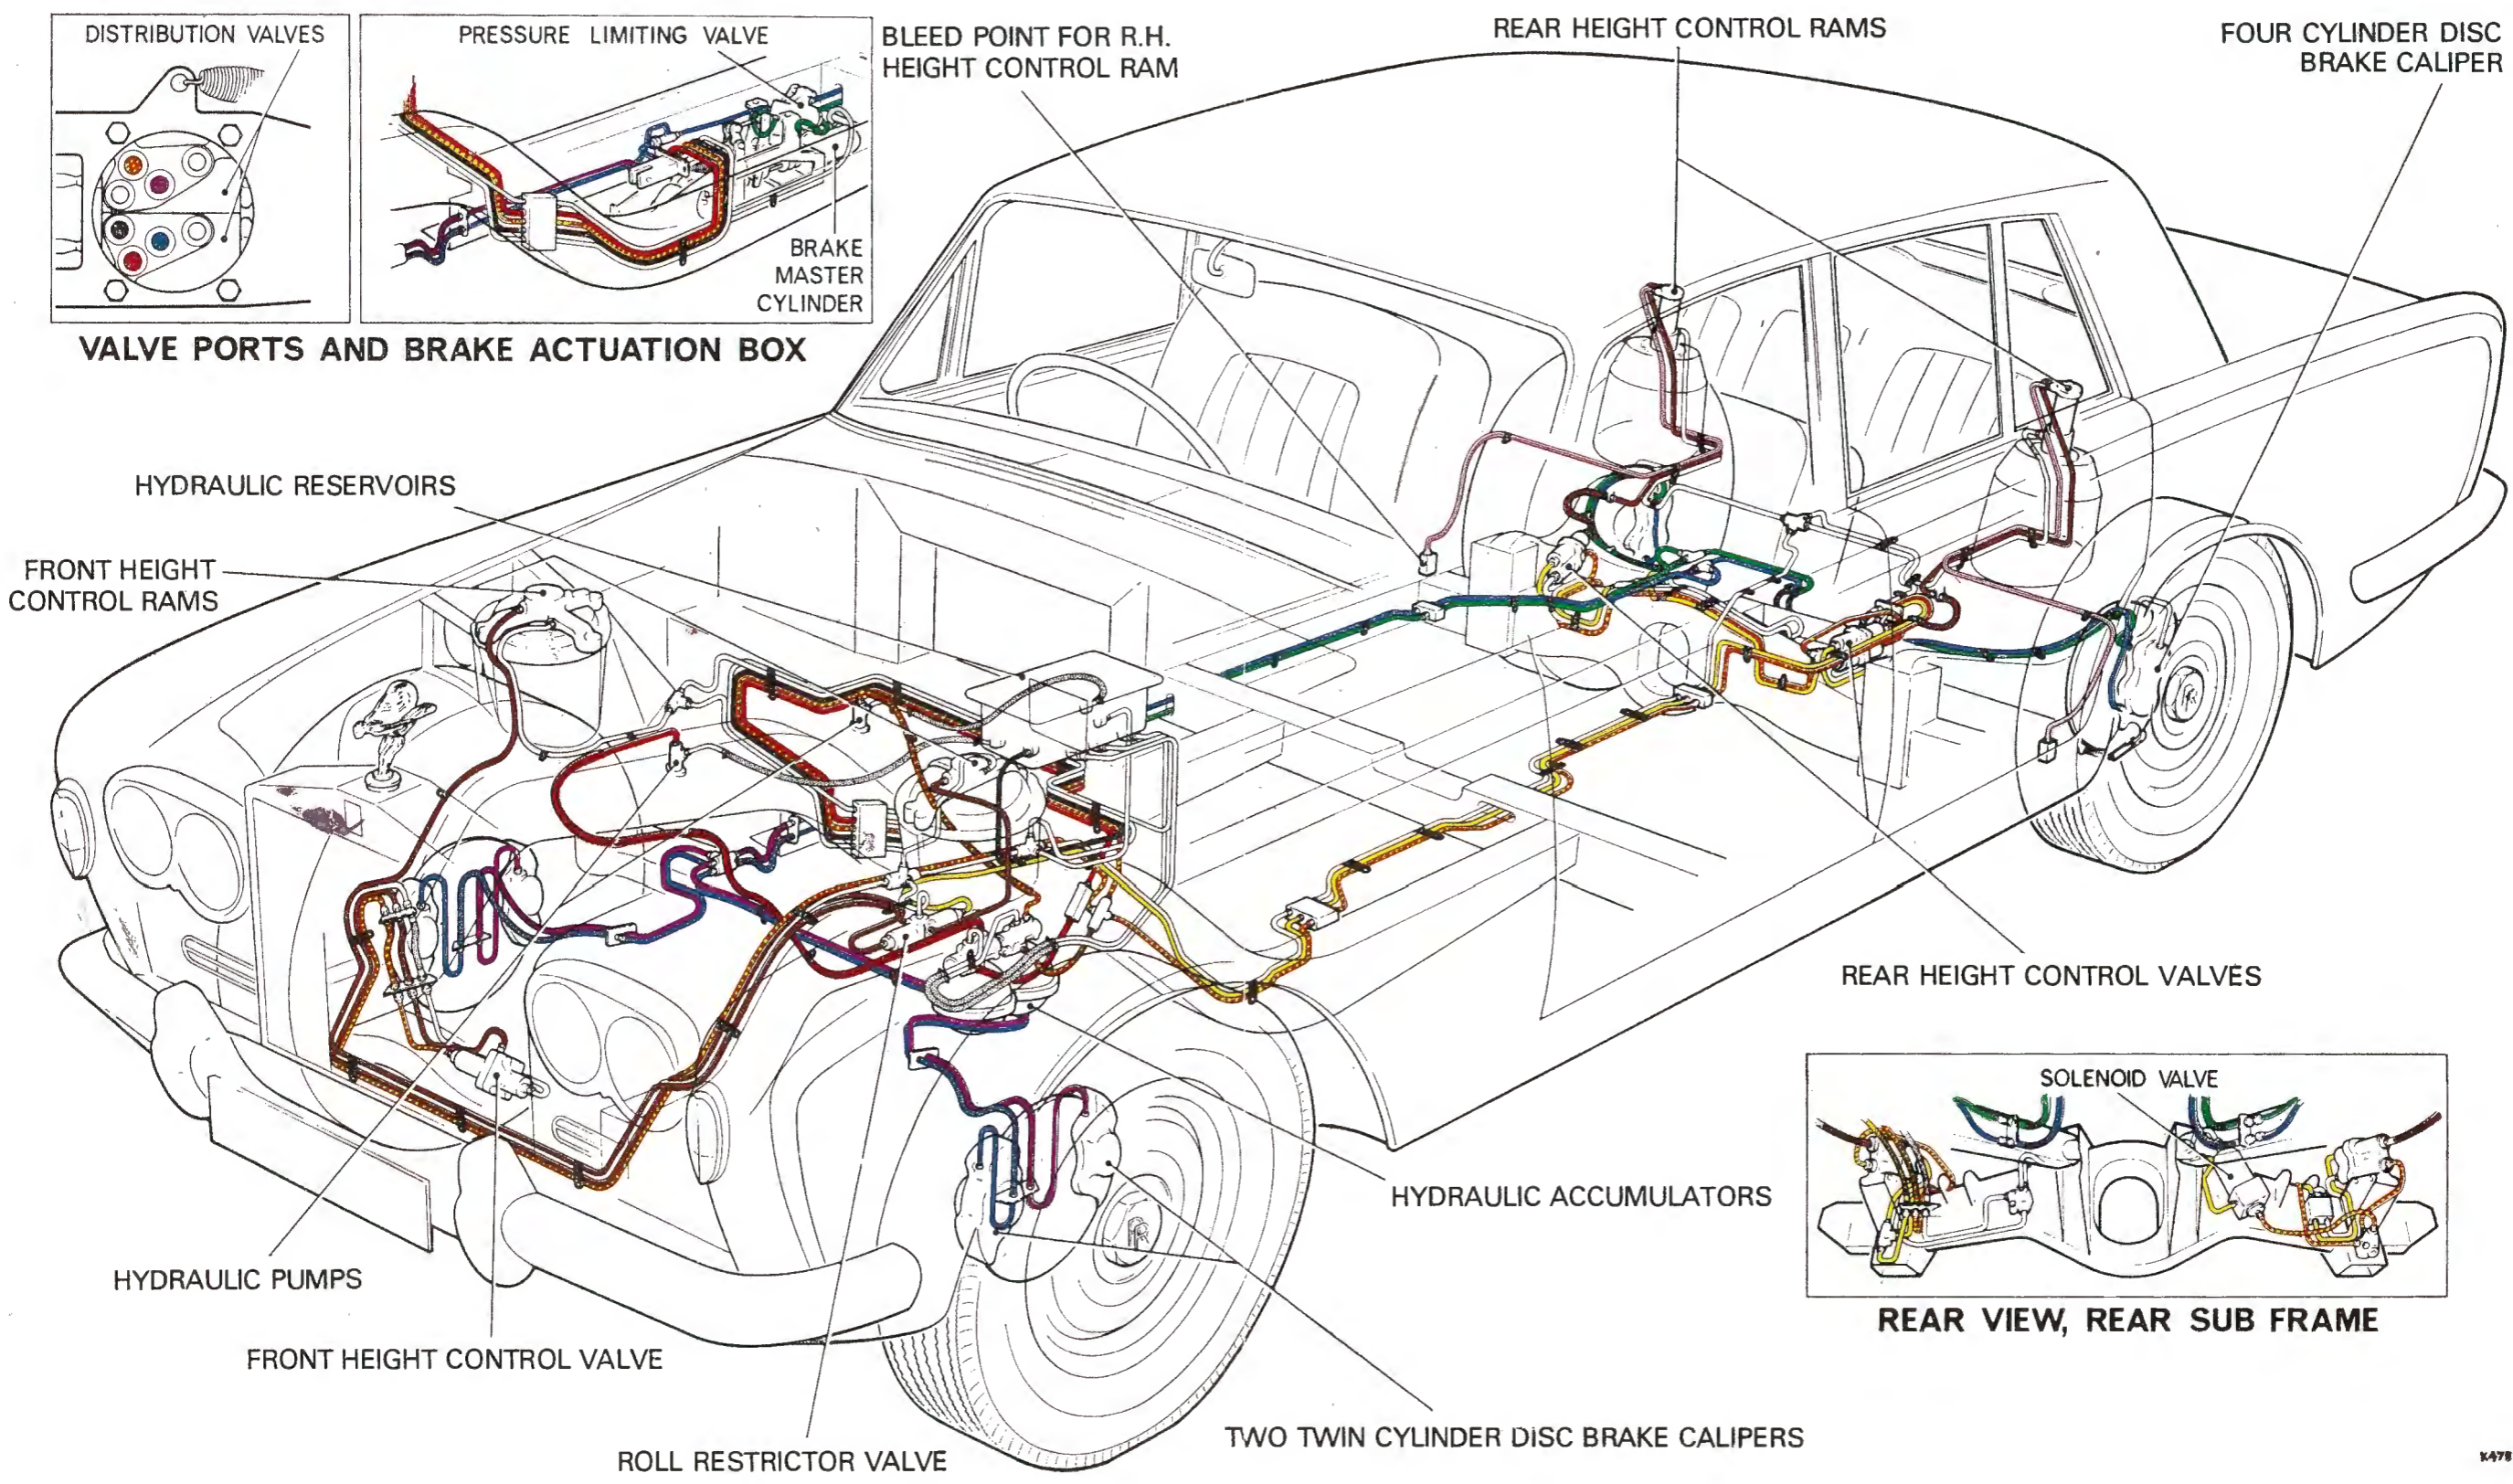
HYDRAULIC SYSTEMS PIPEWORK COLOUR CODING AND COMPONENT LOCATION (LATER R.H.D. CARS)
